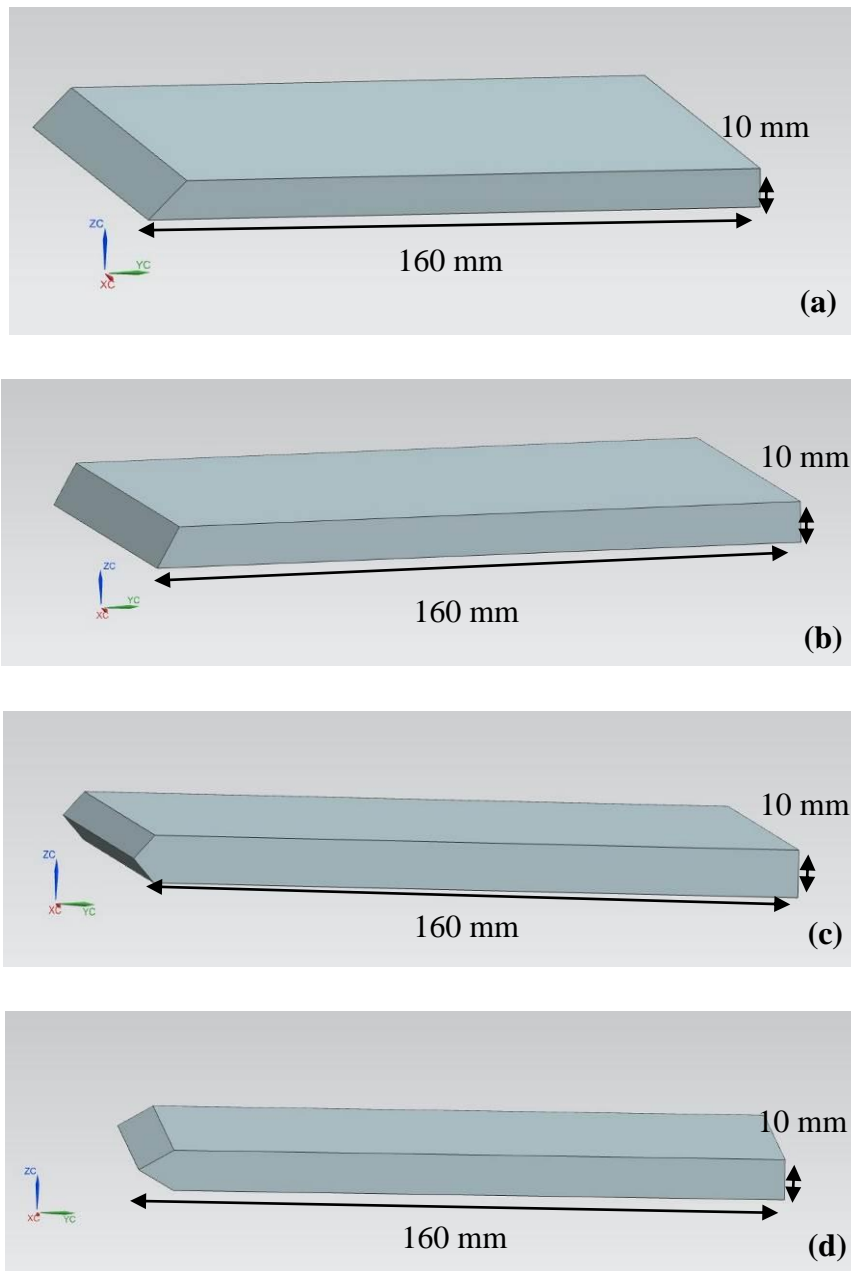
3D drawings for the base metal plates (Siemens NX Drawing for Design)
